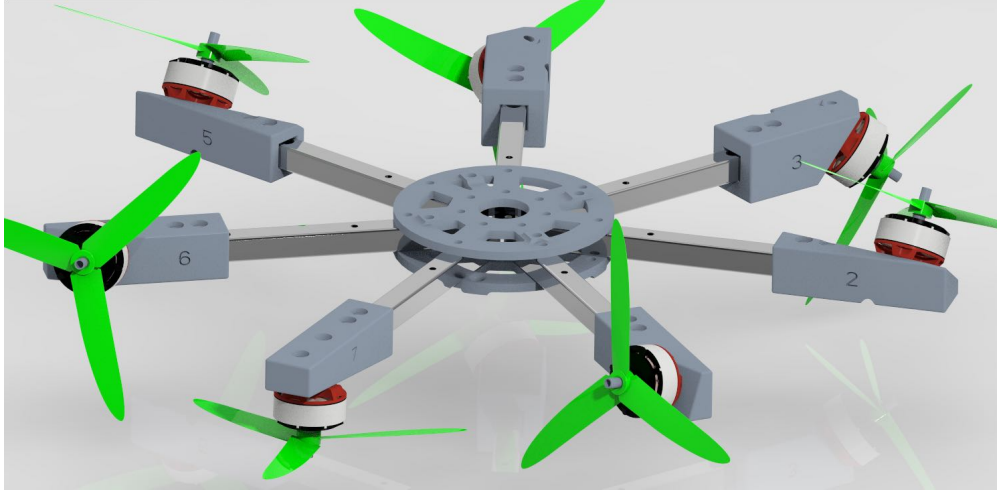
CAD design showing the O_+^7 prototype body assembly. The body assembly shows the motors and propellers connected to the body frame with aluminum bars, where each motor was fastened to the corresponding bar with a CAD designed adapter similar to the one shown in Fig. 5.3. Each of the shown adapters was designed to fit the corresponding orientation v_i in \mathcal{W} .
